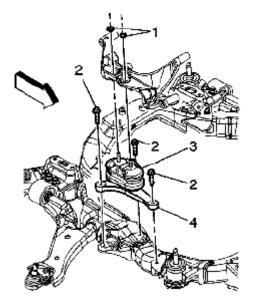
Identifying Engine Mount And Lower Bracket Courtesy of SUZUKI OF AMERICA CORP.
